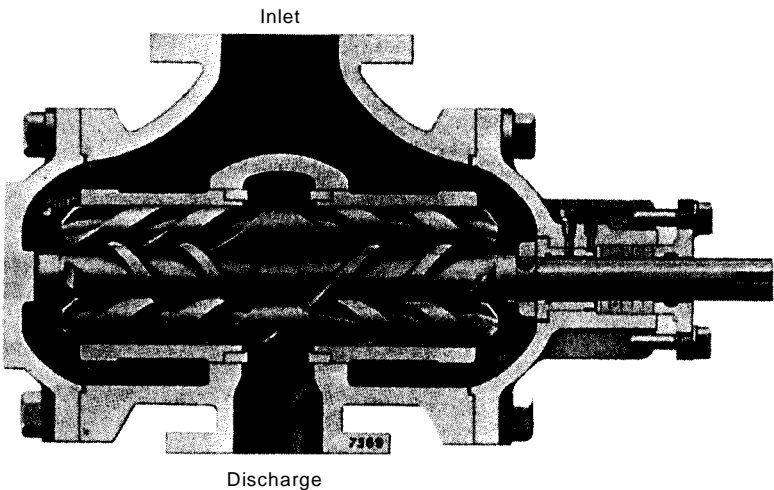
Three-screw rotary pump. Courtesy Imo Pump.
